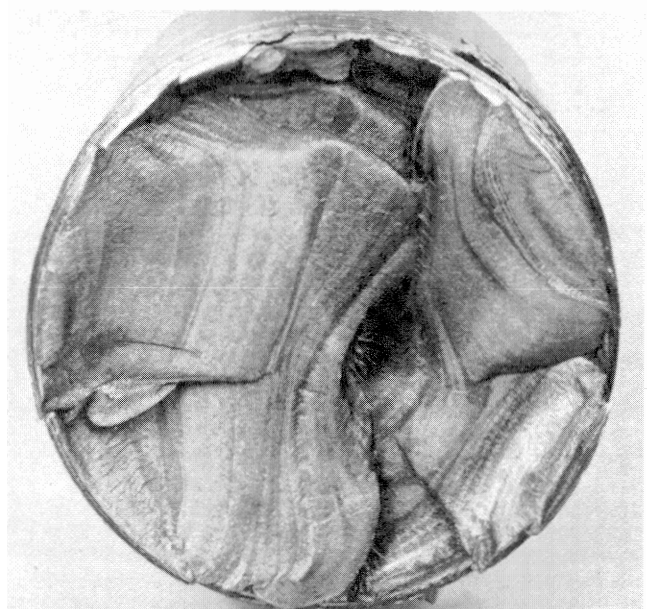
Fracture Surface of Pump Shaft Failed in Fatigue.
